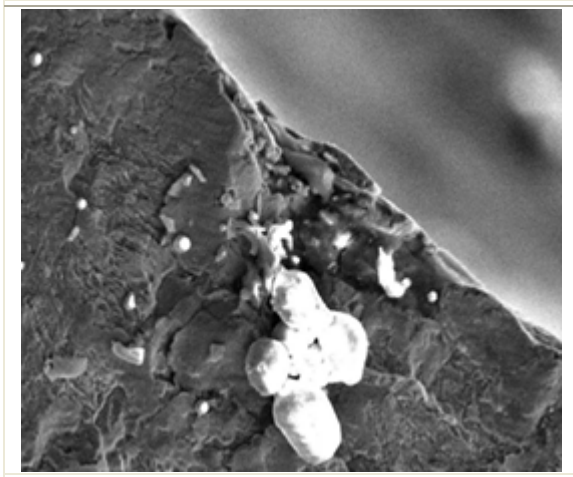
The initiation of the fatigue crack on the defect in the surface layer
